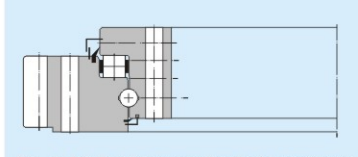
15 Double-row roller/ball combination bearing with external gear
